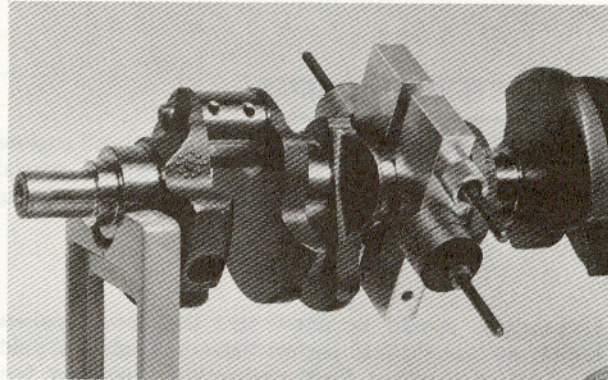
Bobweight Mounted on Crankshaft Throw
